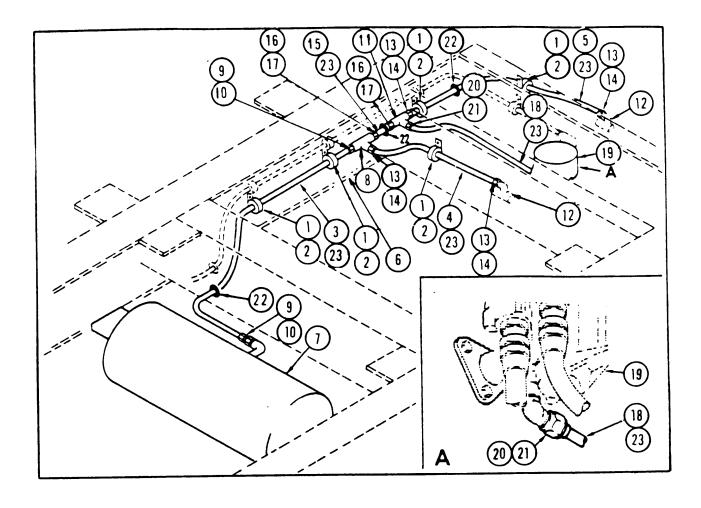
Trailer Air Brake Tubing Sections Between Air Reservoir and Air Chambers Assemblies ~(ARMY)
